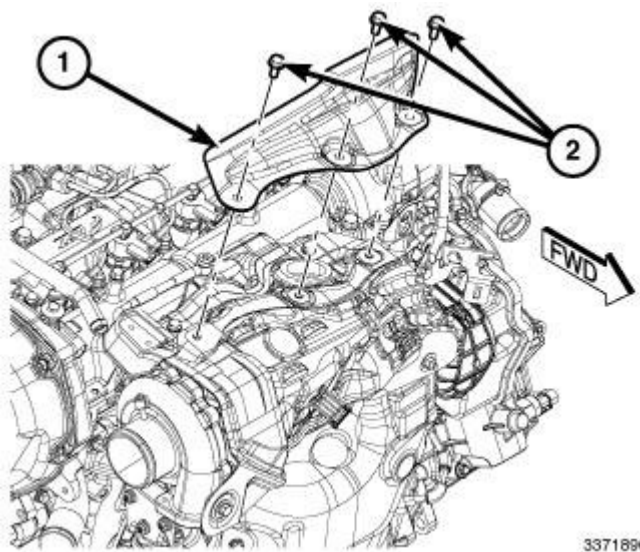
Upper Turbocharger Heat Shield & Mid Upper Turbocharger Heat Shield
